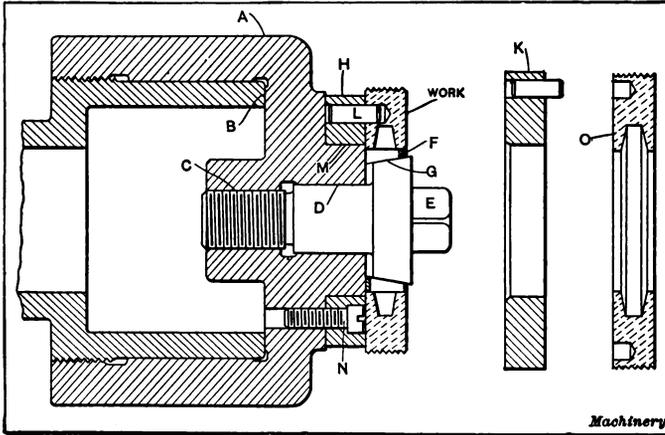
Arbor having Taper Plug which expands Split Bushing
